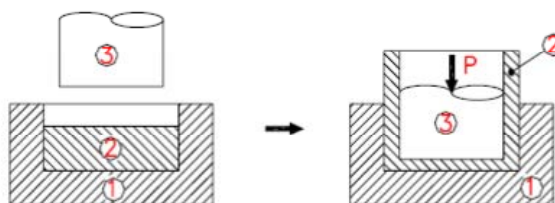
Reverse extrusion process: (1) die; (2) workpiece; and (3) punch
